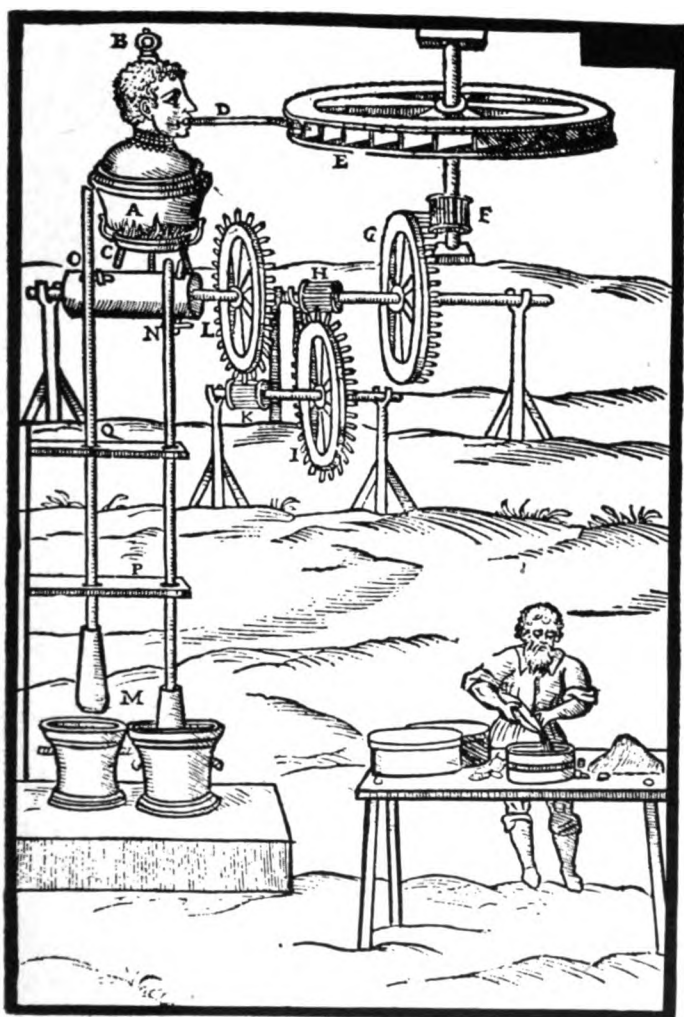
Branca steam turbine from his book printed in 1629 A. D., indicating the original form of line shafting bearings which originated from the forked branch of a tree.
